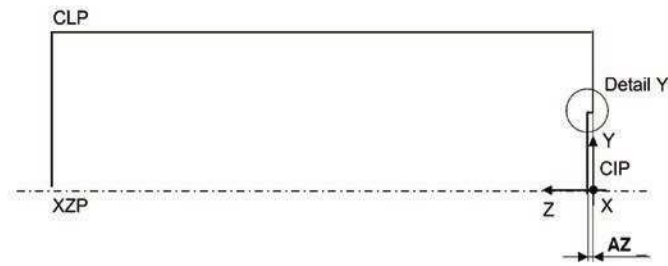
Non-centre cutting end mill: Sketch of the cutting part
